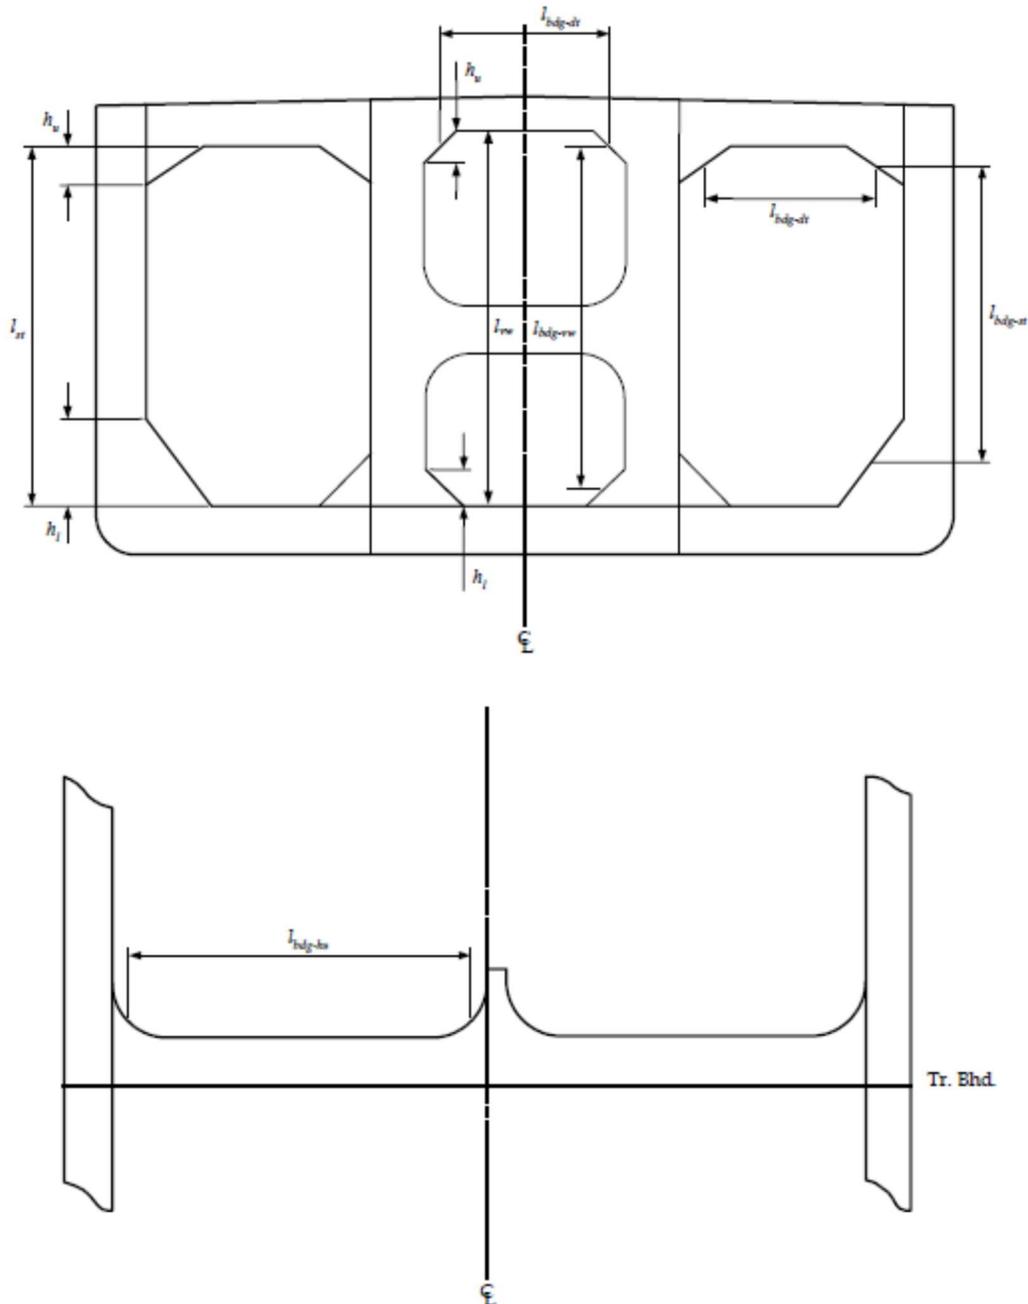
Definition of Spans of Deck, Side Transverses, Vertical Web Frames on Longitudinal Bulkheads and Horizontal Stringers on Transverse Bulkheads (Continued)
